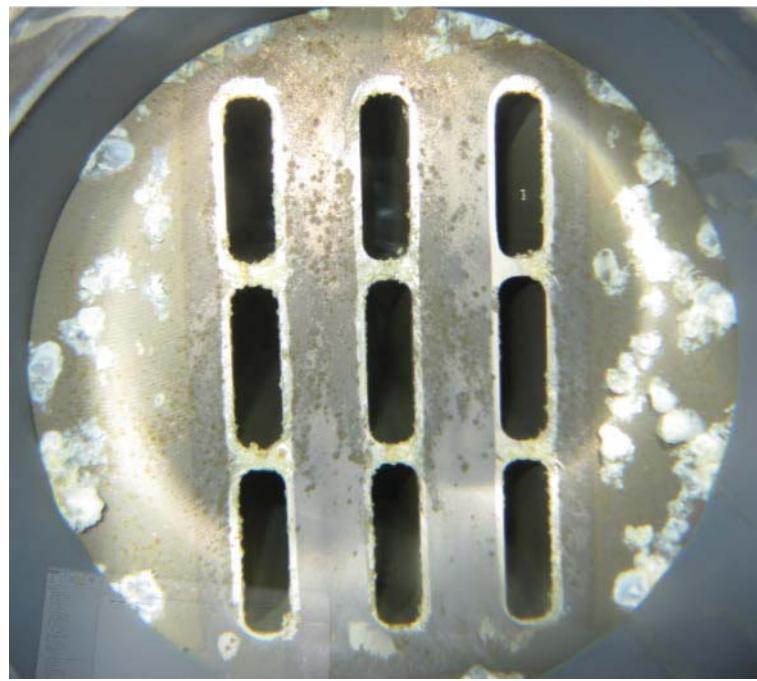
MHE coupon water exit tube sheet after 5 months of exposure to 674m deep seawater.
